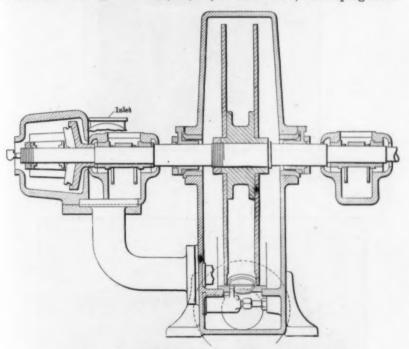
SECTIONAL VIEW OF TERRY TURBINE
